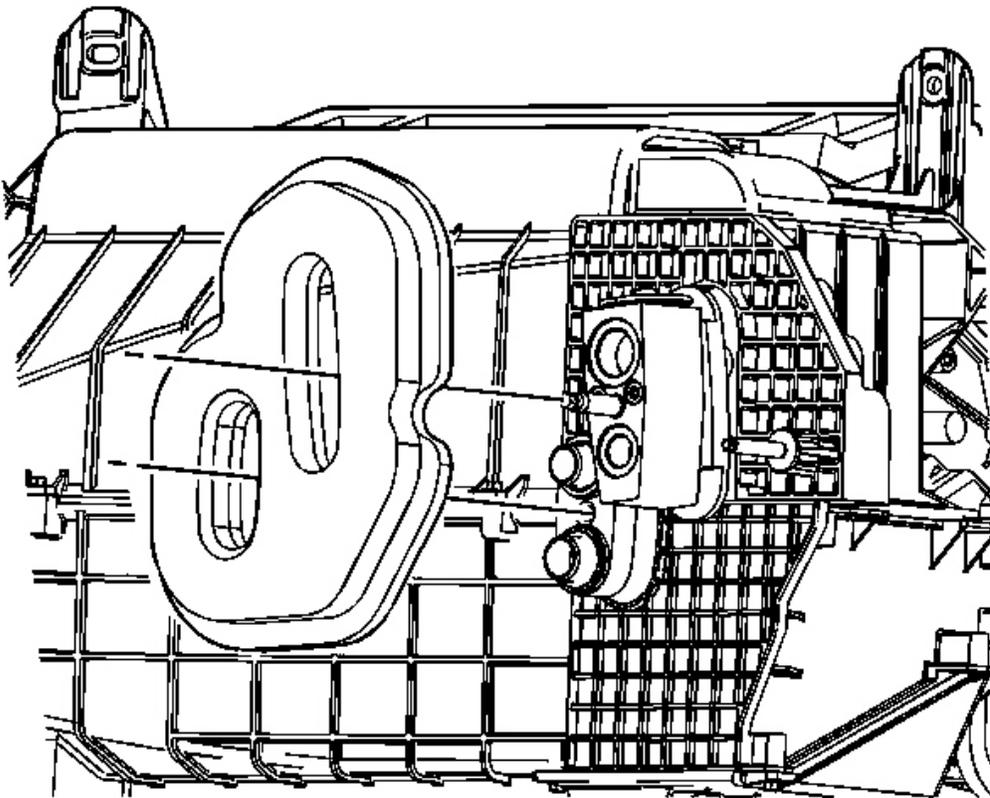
Identifying HVAC Module Assembly Foam Seal
